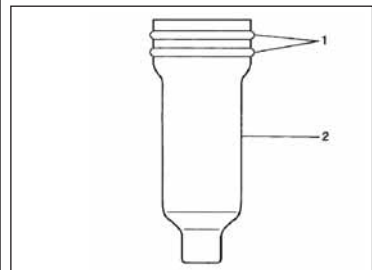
The 2001-2006 GM 6.6L Duramax diesel engine uses a removable sleeve to locate and house the injectors. These sleeves are in direct contact with the engine coolant, which allows the injector to be a constant temperature.
